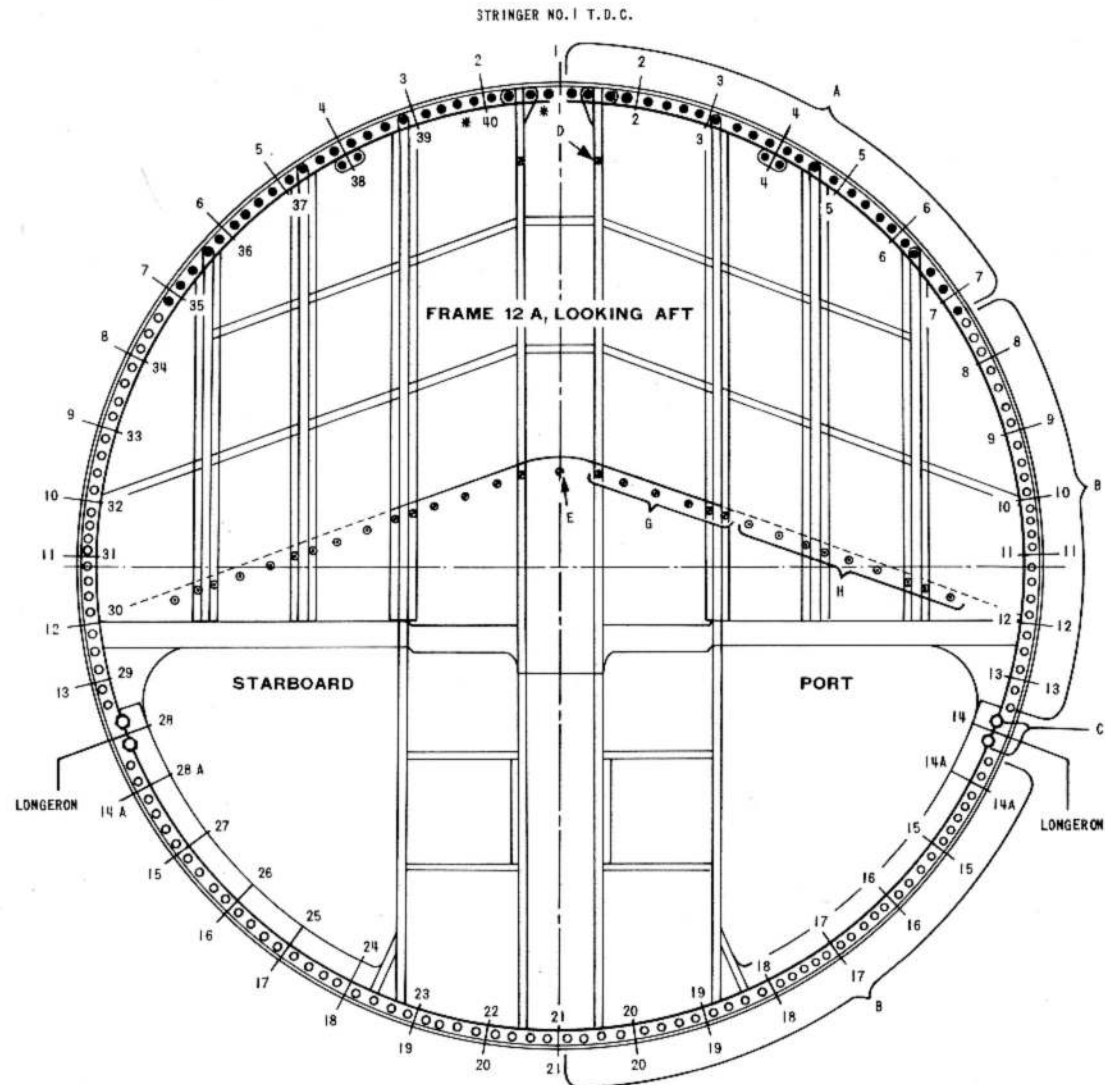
ATTACHMENT BOLT DETAILS - FRONT-TO-CENTRE FUSELAGE
